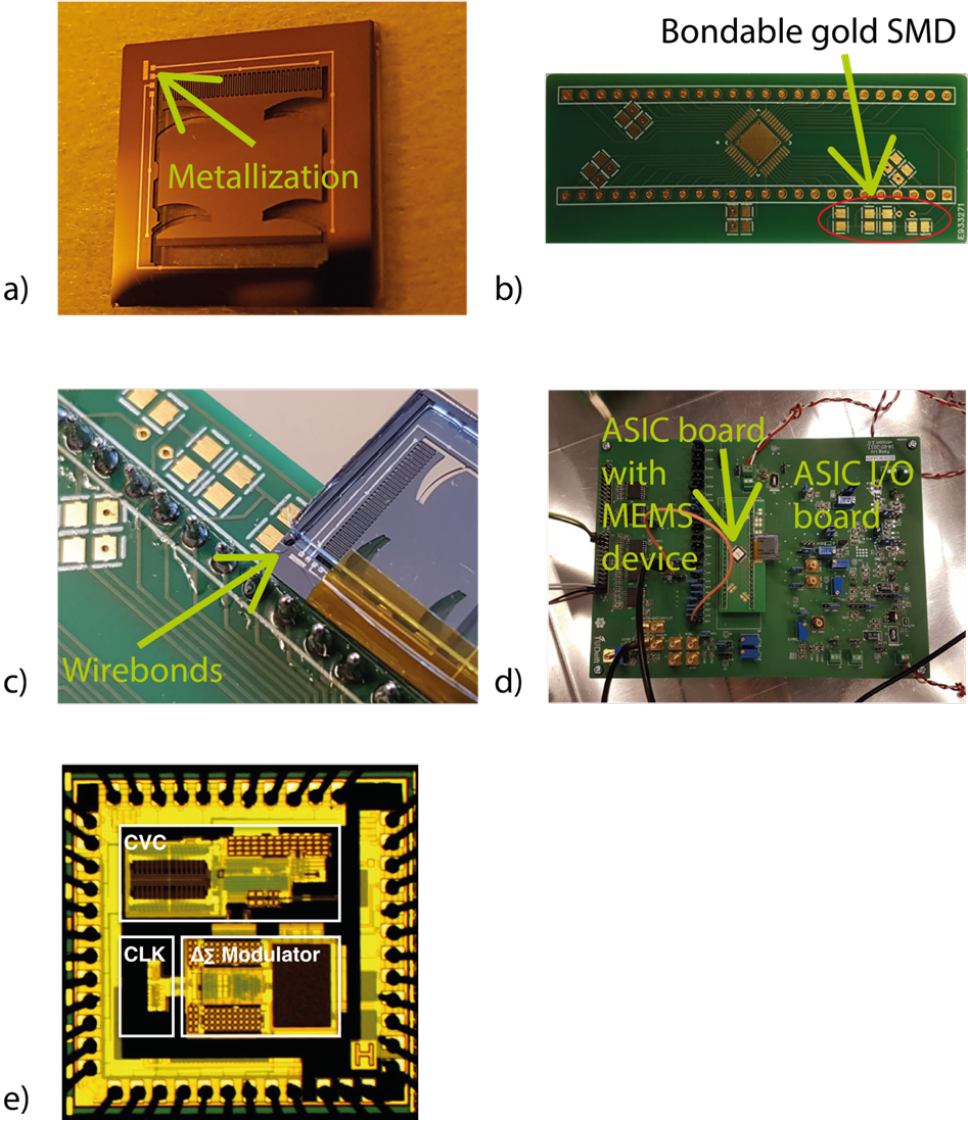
a) Final device after release, b) Interconnect PCB on which the ASIC is situated; the bondable gold SMD pads (circle) are used to wirebond the mass/beam system die on, c) UV glued and wire-bonded accelerometer on top of the daughter PCB and, d) Daughter PCB in the measurement setup, along with the metal box to shield the setup from external EMI interference, e) ASIC chip.
